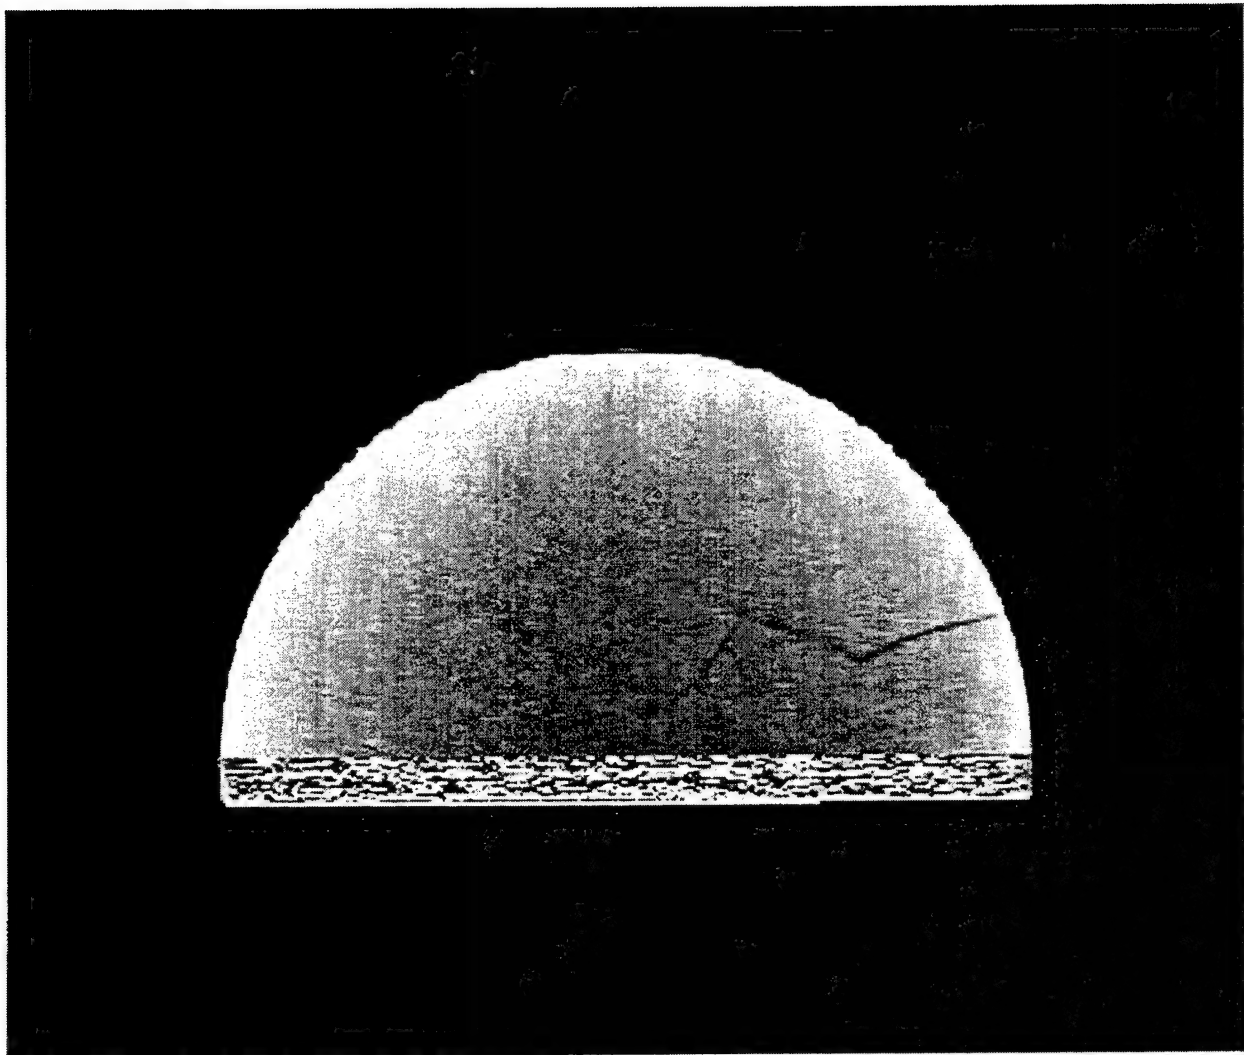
9.19 mm from bottom of disk with 65° rotation about X-axis.
